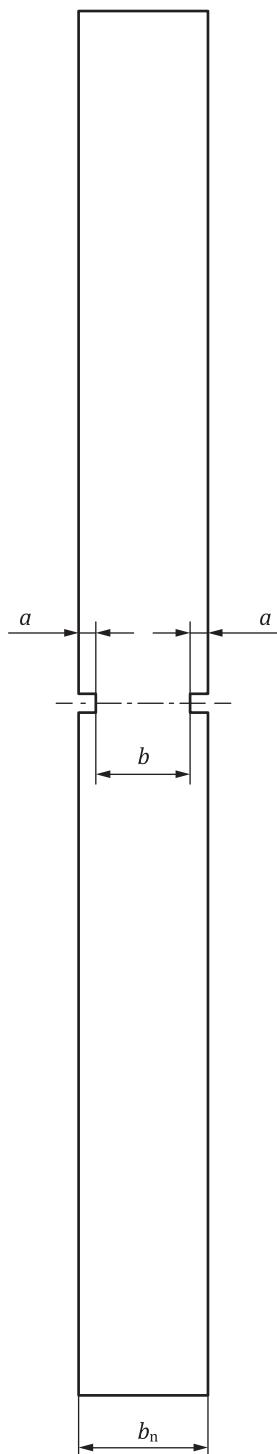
Notched test specimens, with dimensions a , b and b_n as defined in [Clause 3](#)
